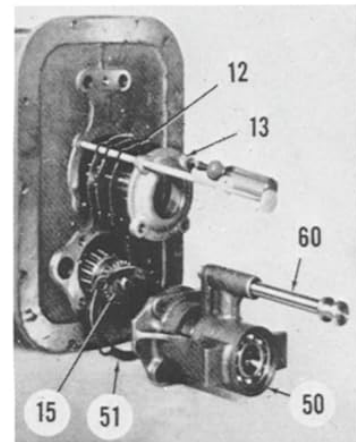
Rear face of TO transmission housing showing shims (12) for adjusting the main shaft bearings and shims (51) for adjusting the countershaft bearings.
